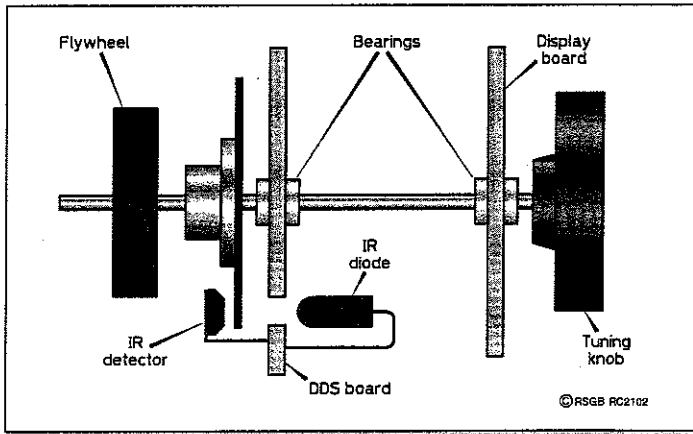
Alternative mounting method (not to scale), where the DDS board is mounted parallel to the display board on spacers (not shown). A small hole is drilled in the DDS board to pass the infra red, and the rear bearings are fitted to the DDS board. The leads for the detector pass through the board to the tracks, which are cut to avoid interference with the rear bearing. The detail will become apparent when the DDS board is described.
